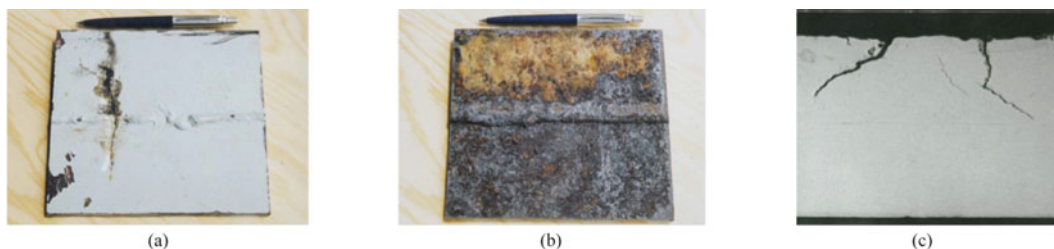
Nitrate SCC of CS casing of Heat Recovery Steam Generator (HRSG) in a Co-Generation Plant. (a) The outer surface of a steel plate cut from an HRSG casing. Note the crack running perpendicularly to butt-weld. (b) The inner surface of a steel plate cut from HRSG casing. Note the rusty corrosion products and adhering insulation (top). (c) Cross-section through casing plate. Small cracks originating from inner surface of the plate. Corrosion products: Nitrate (as N) 760 ppm, sulfate 2 ppm, chloride 6 ppm, pH 5.3, outer surface of an HRSG casing at different locations yielded values that ranged from 24 °C (75 °F) – 29 °C (85 °F) at startup to 46 °C (115 °F) – 64 °C (148 °F) during operation. (Source: NACE Paper 07485)
